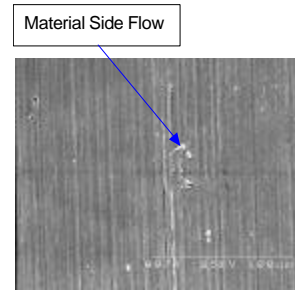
(a): Surfaces generated after machining under conventional coolant supply
